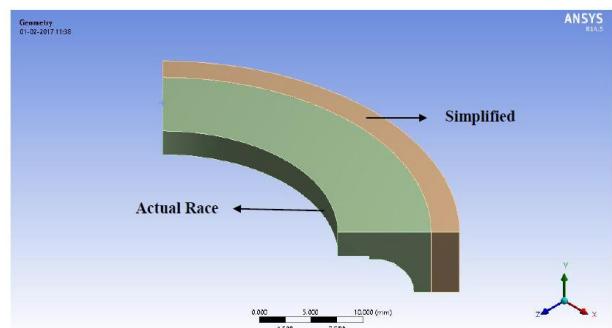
Quarter Segment Model of Lower Assembly with Boundary Condition
